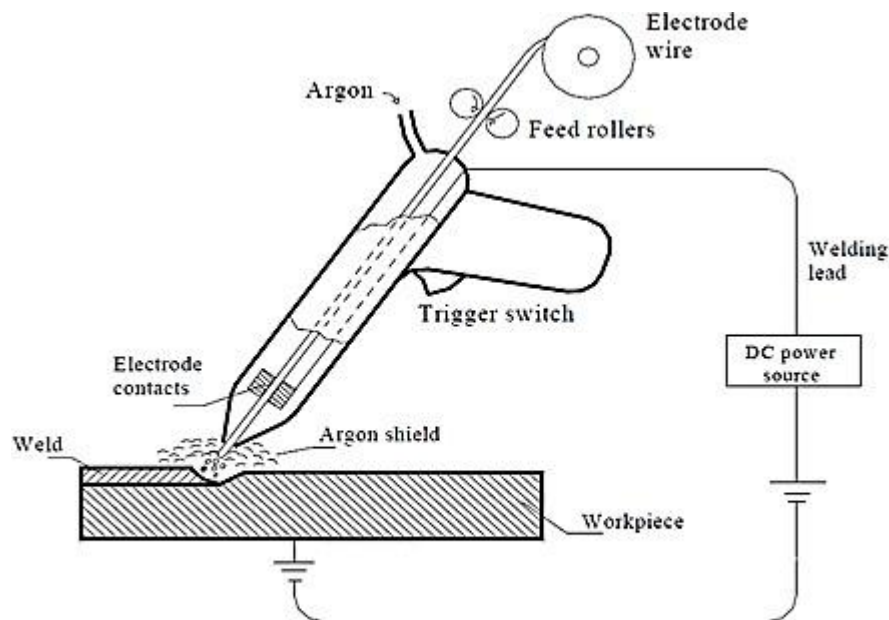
Metal Inert Gas (MIG) Welding
